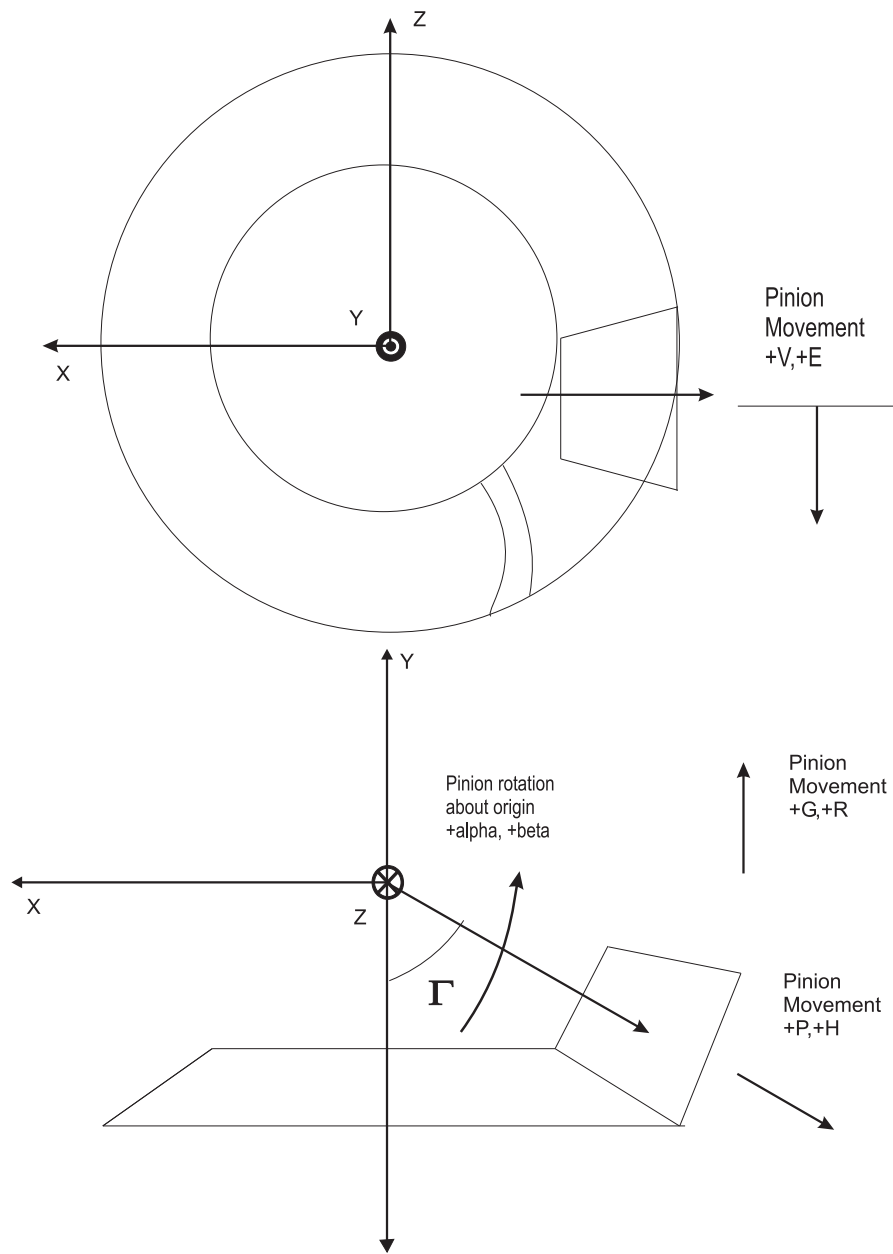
Sign convention for modelling assembly errors for a righthanded gear
